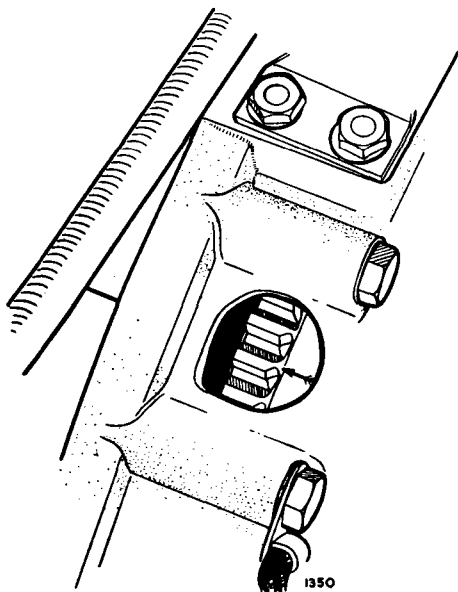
Showing the location of the Top Dead Centre marks on automatic transmission cars as viewed from the left-hand side of the combined engine and transmission unit. (Early cars).
